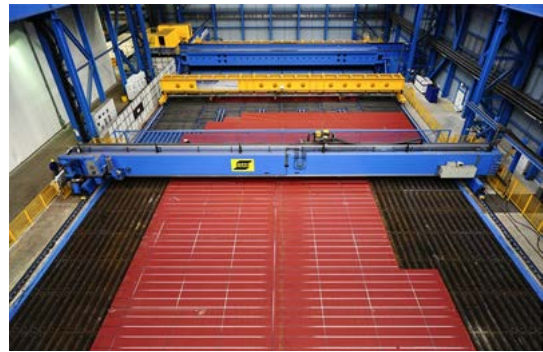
Hybrid welding of ship deck plating panels, butt joints of plates and welding stiffening elements. Laser CO<sub>2</sub>, 12 kW. Shipyard Meyer, Germany [5]
